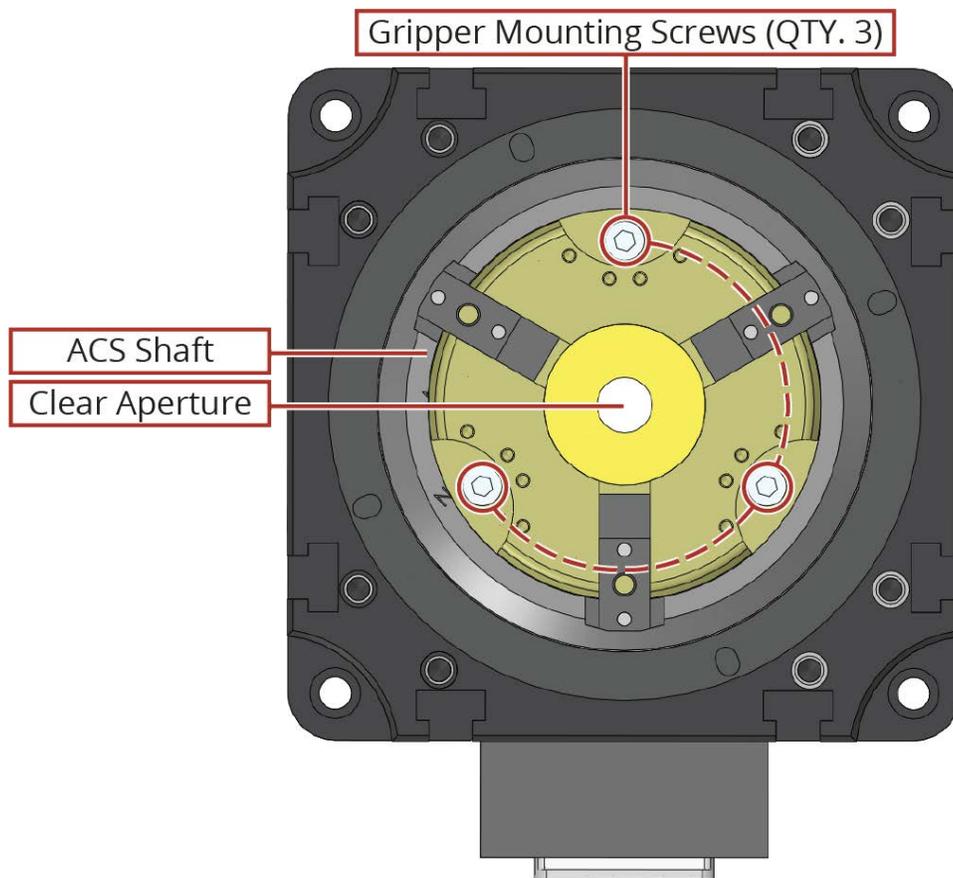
Mounting Holes for Three-Jaw Gripper
